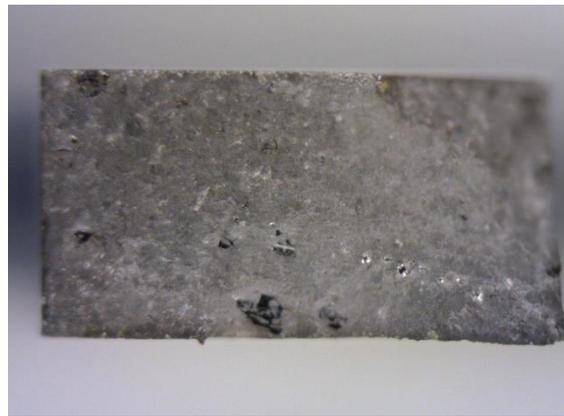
TENSILE TESTING HIP TEST PIECE (HFL1)
